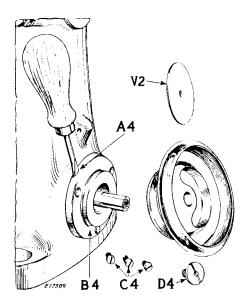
Removing Arm Rotary Shaft Flanged Bushing
